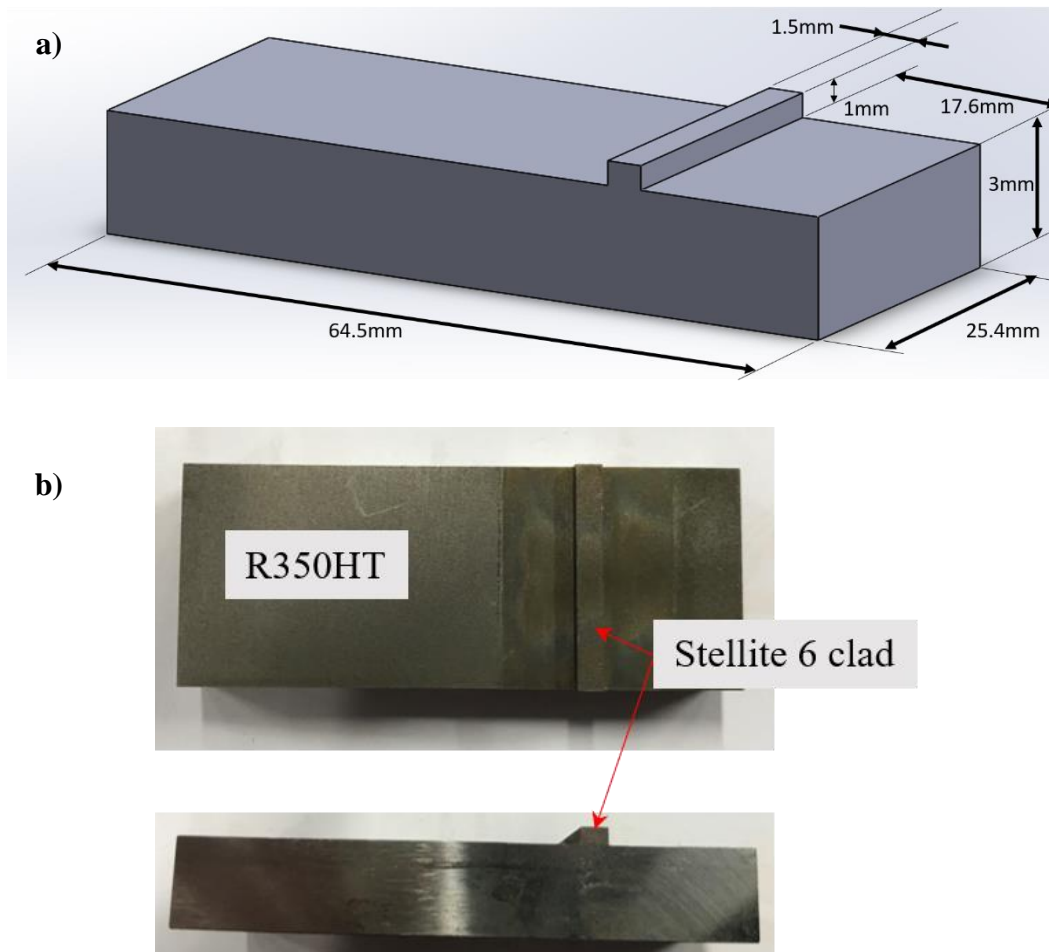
(a) Schematic showing shear test specimen dimensions, (b) Test specimen extracted from clad rail steel section
